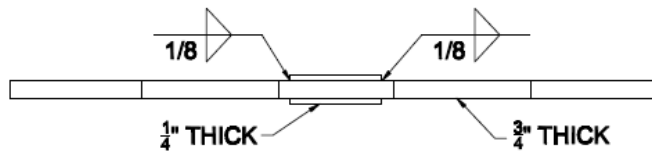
Design Drawing for the Single Frame Configuration – Fabrication Pieces
